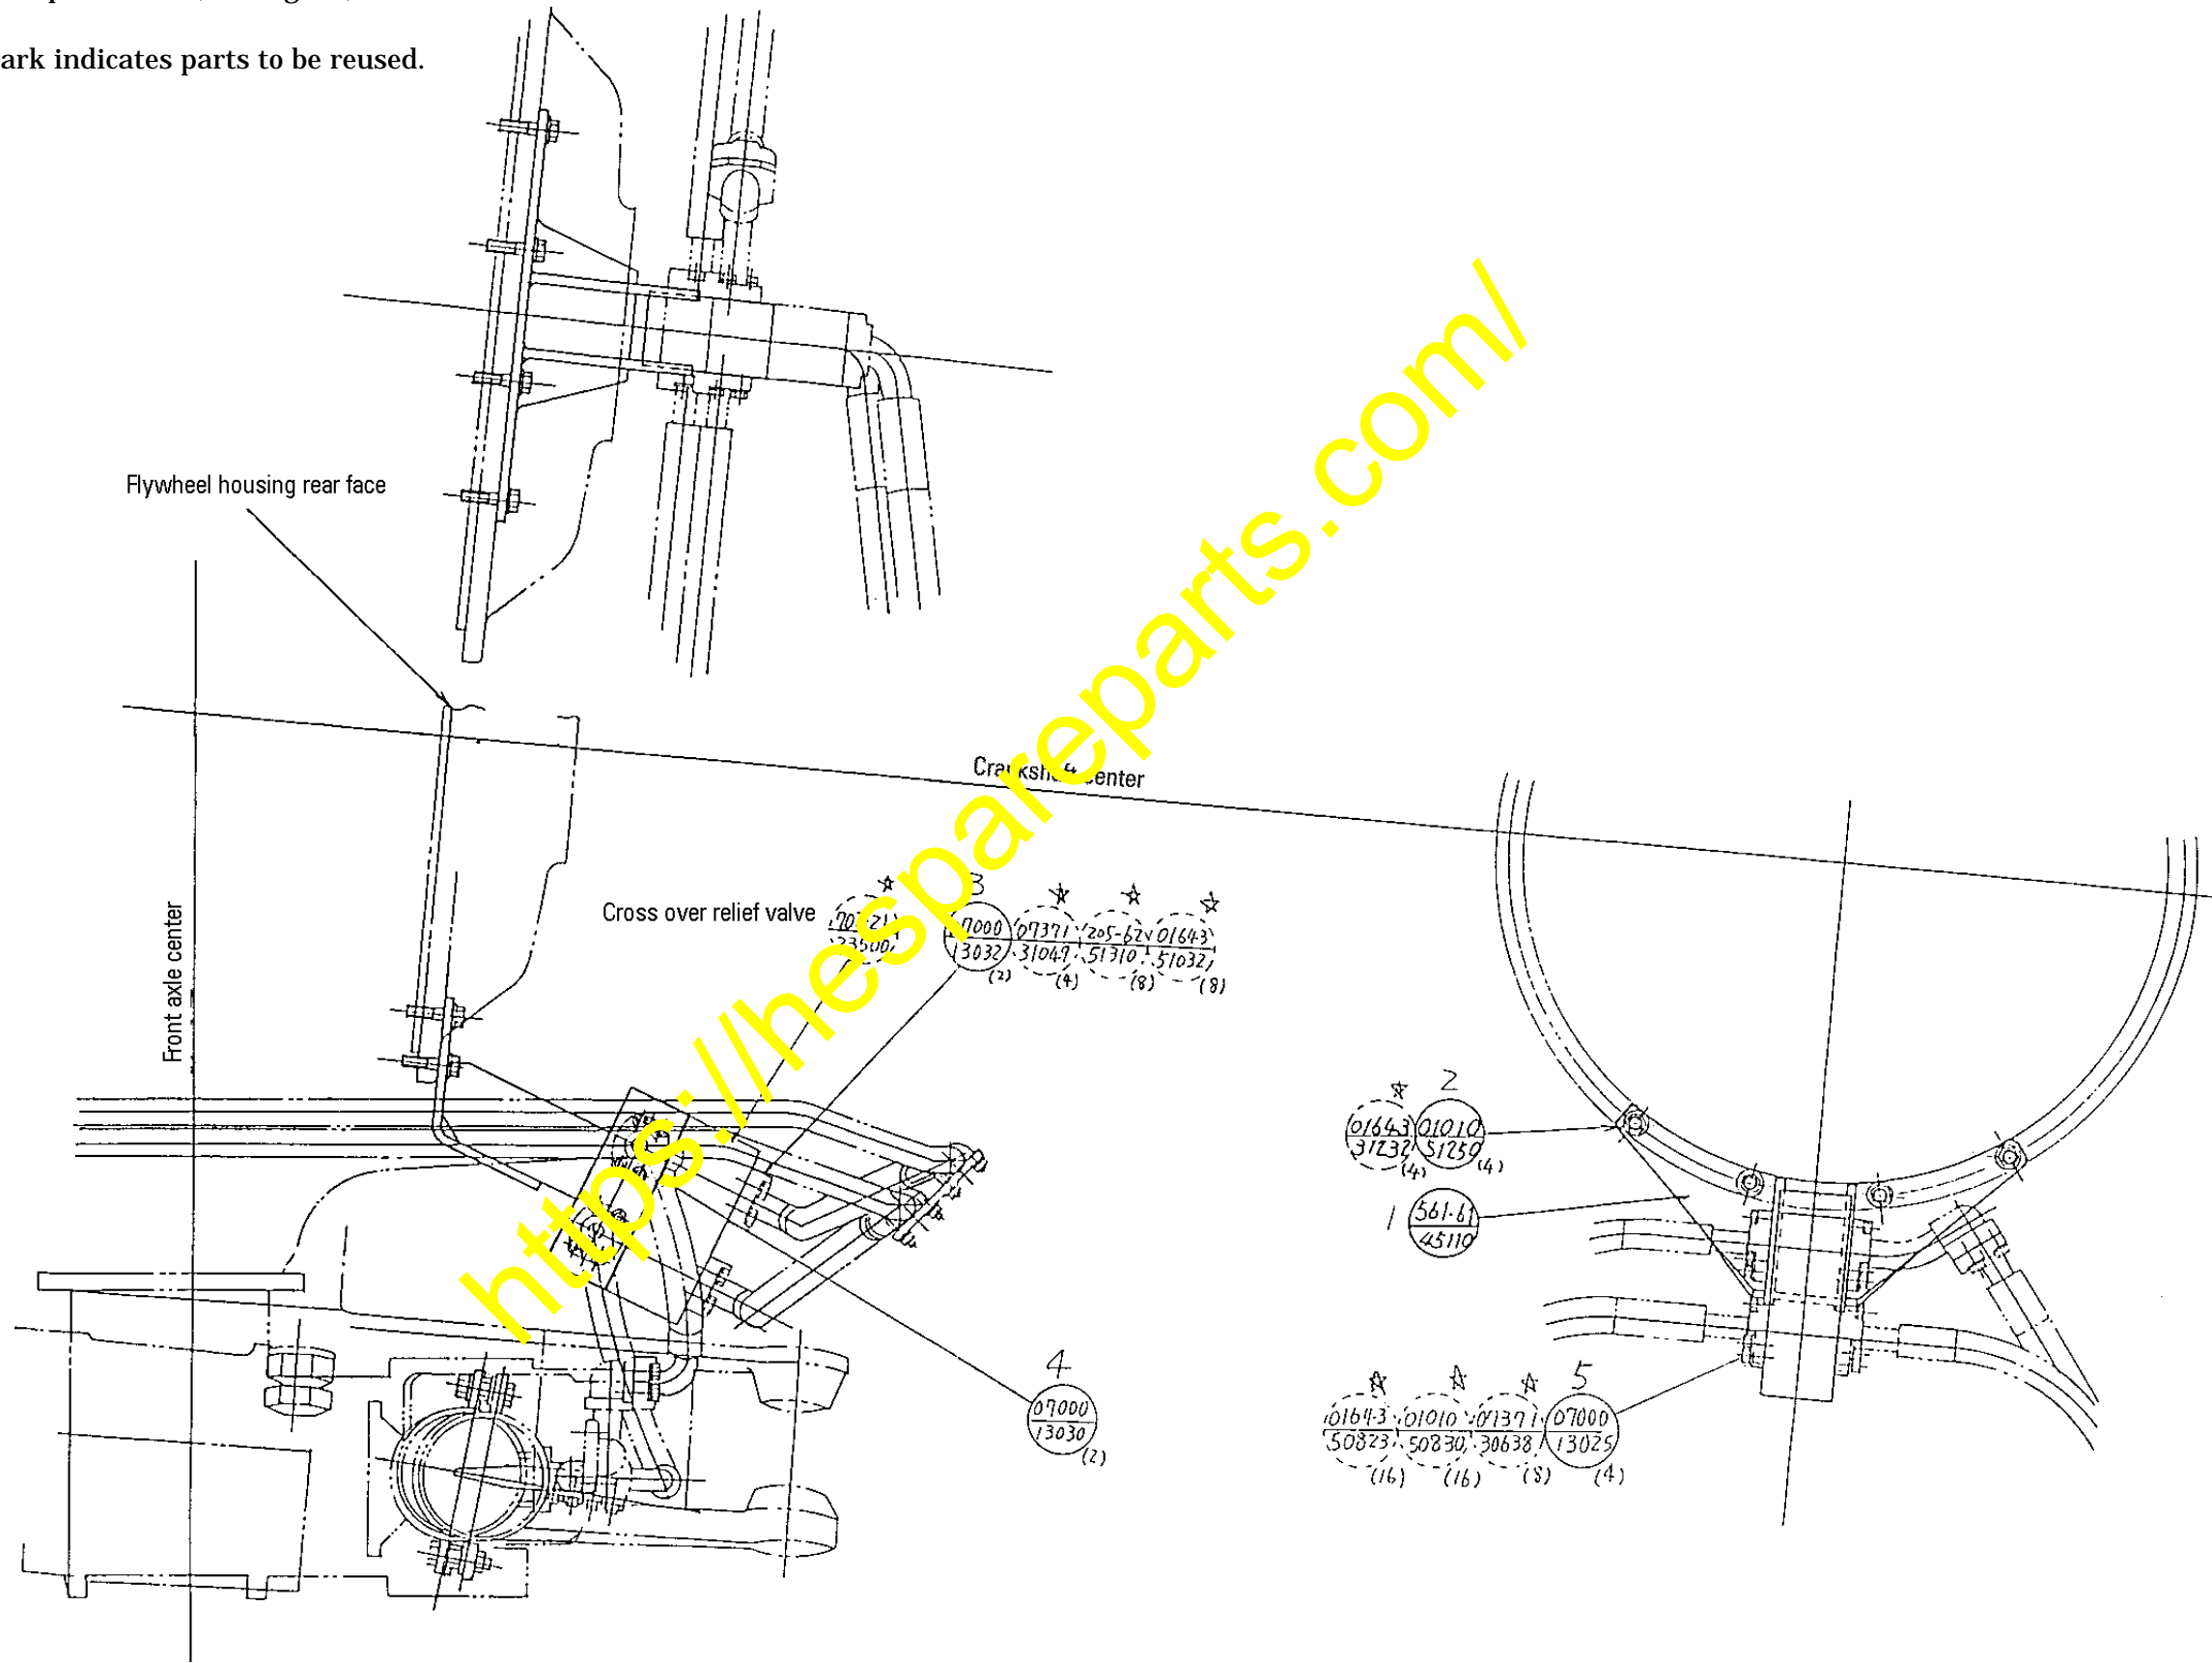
Crossover Relief Valve Mounting Block Assembly Drawing
